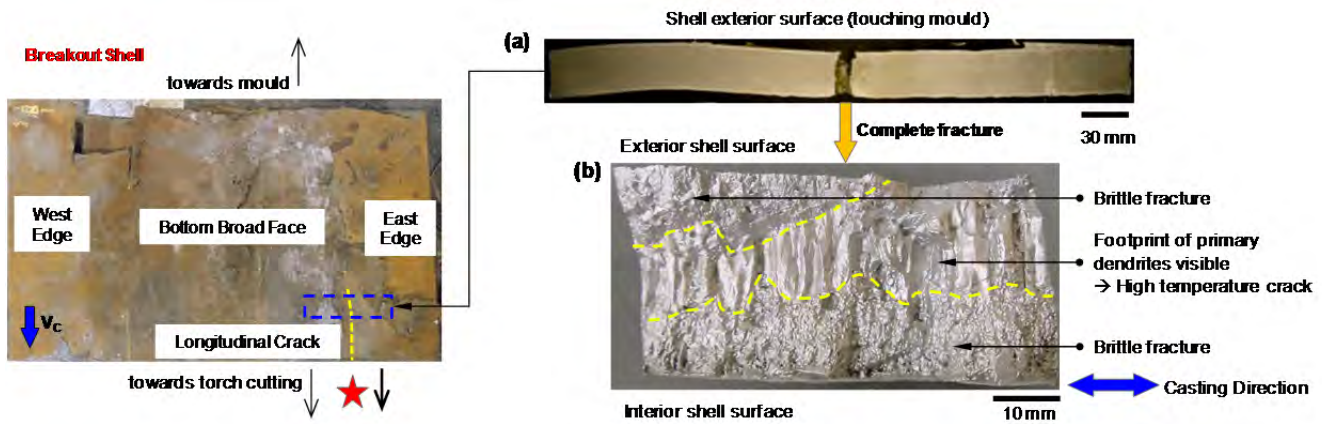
(a) Sample from breakout shell with crack, (b) Fracture surface after sandblasting
